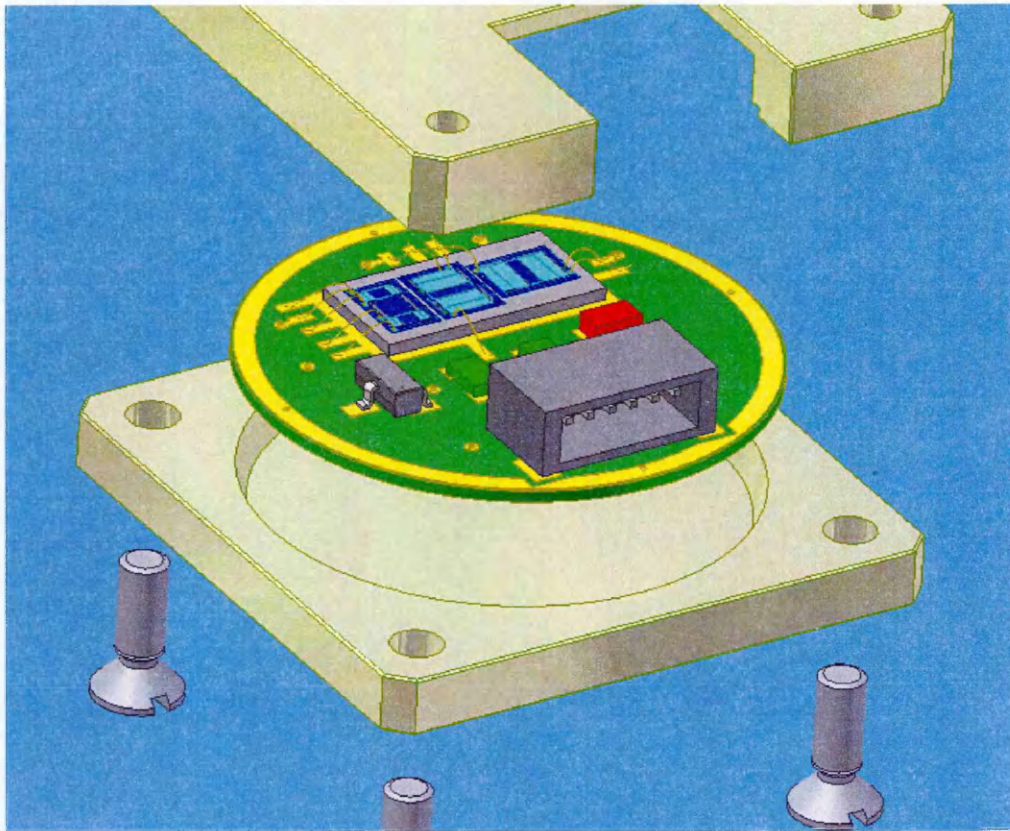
View of Prototype Accelerometer - Sensor Side
